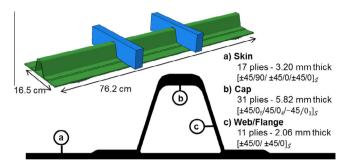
A 76.2 cm long IM7/8552 specimen with hat-stiffened cross section.
